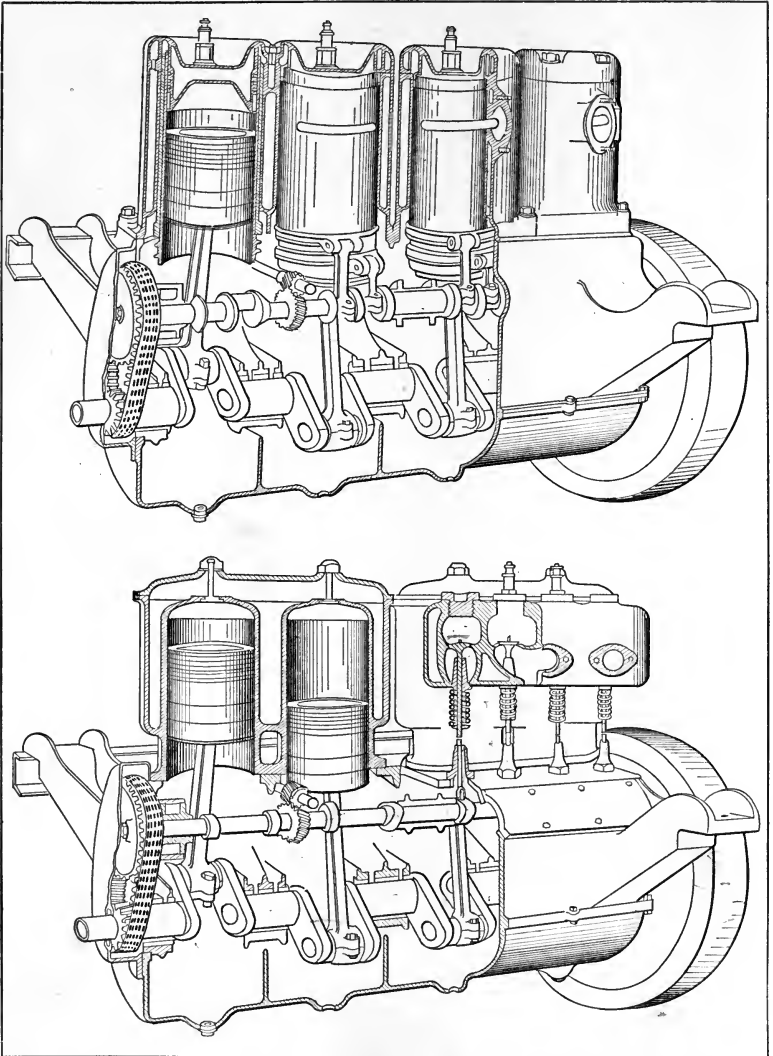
Comparing Poppet Valve and Sliding Sleeve Valve Power Plants. Upper View Shows Knight Engine with Sleeves to Control Gas Ports. Lower Illustration Shows Gas Passages Controlled by Mushroom Valves.
